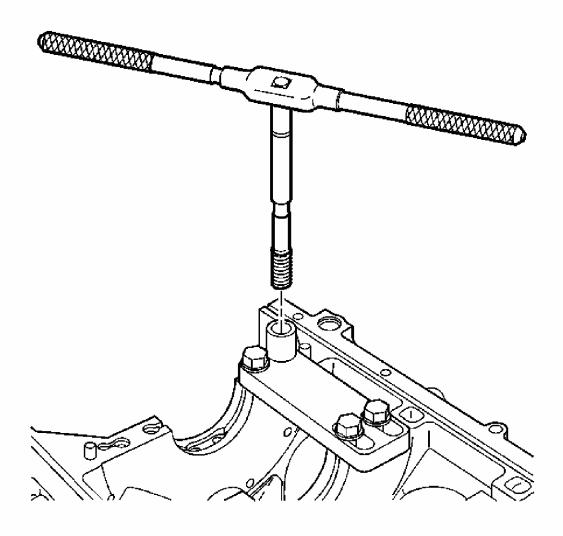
Installing Insert & Installation Driver - Crankshaft Main Bolt Hole Courtesy of GENERAL MOTORS CORP.
